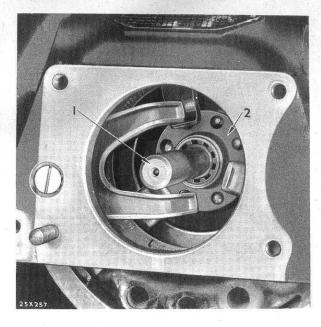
Clutch Disc Aligning Arbor (11 Inch Clutch)
